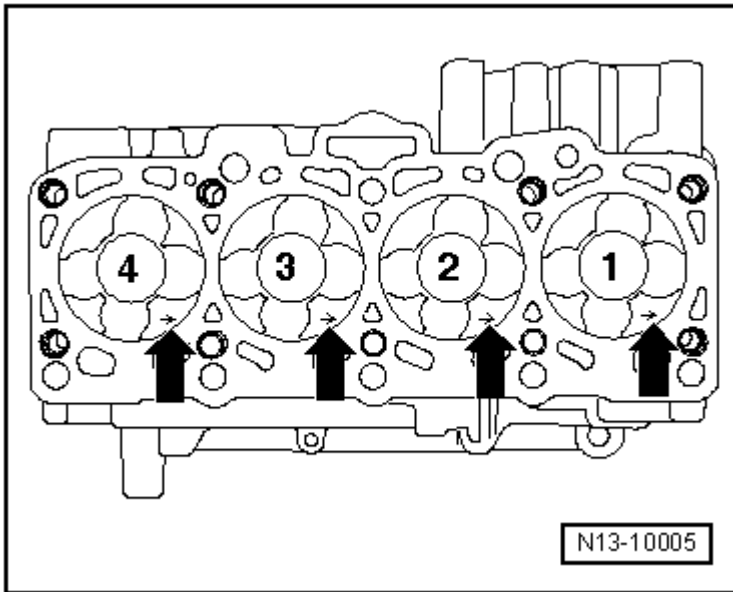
Identifying Installed Position of the Piston and Piston/Cylinder Allocation
